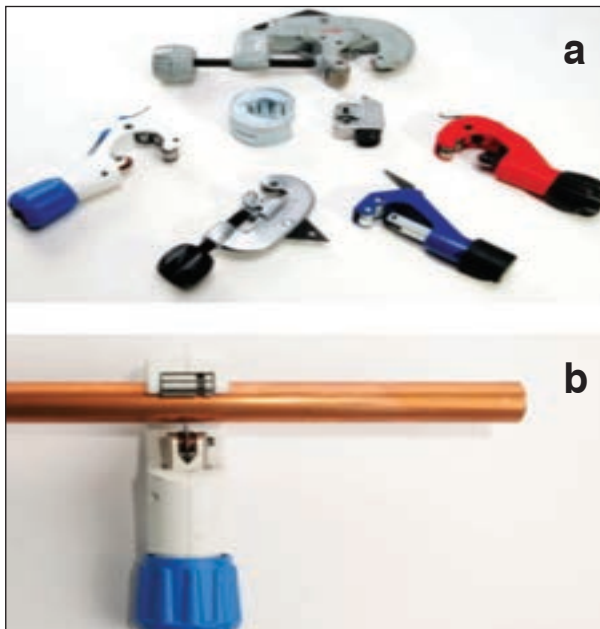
(a) Tube cutters (b) Cutter position for square cut, perpendicular to run of tube
